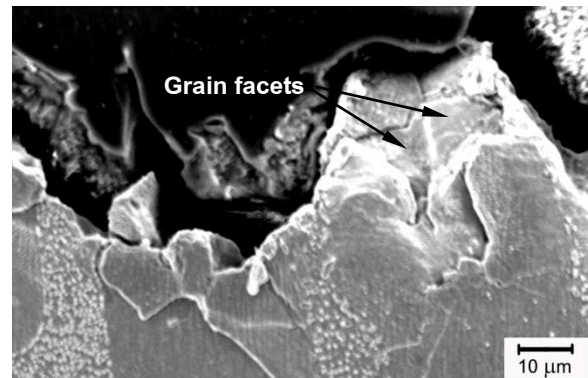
The cross-sections through the fractured surface of Sn-3.0Ag-0.5Cu solder tested under a frequency of 0.1 Hz at 70°C.
